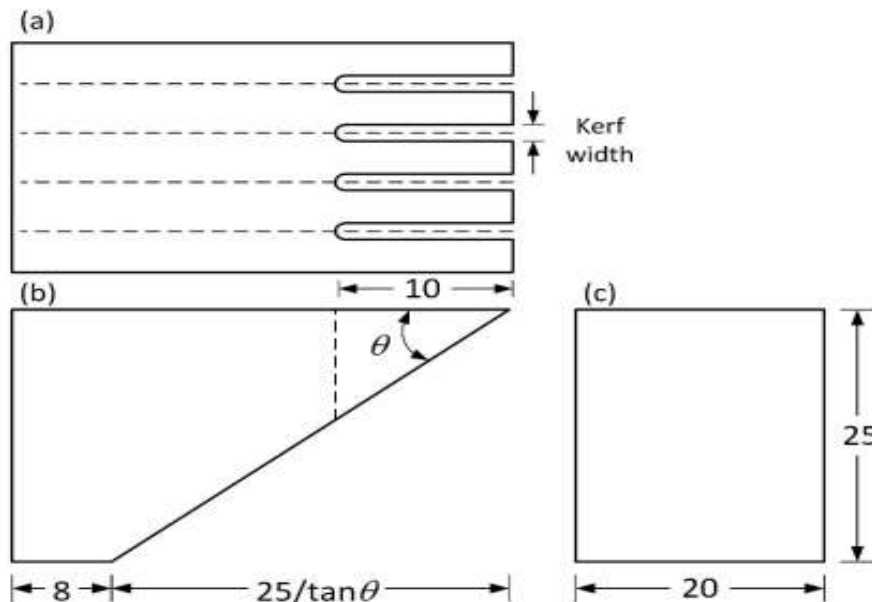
Tapped blank and slots cut through wire EDM, (a) top view, (b) Front view, (c) side view.
